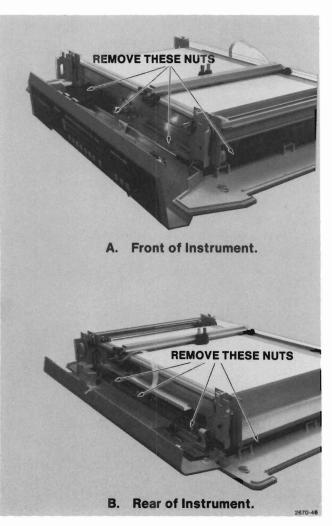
Nuts Holding the Pen Drive Mechanism Assembly.
